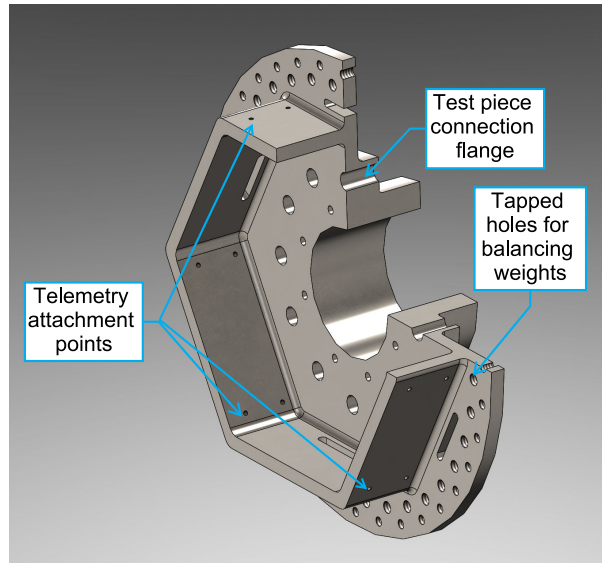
Multi-function disc: balancing plane, holder for measurement electronics, and shaft-test piece joint.
